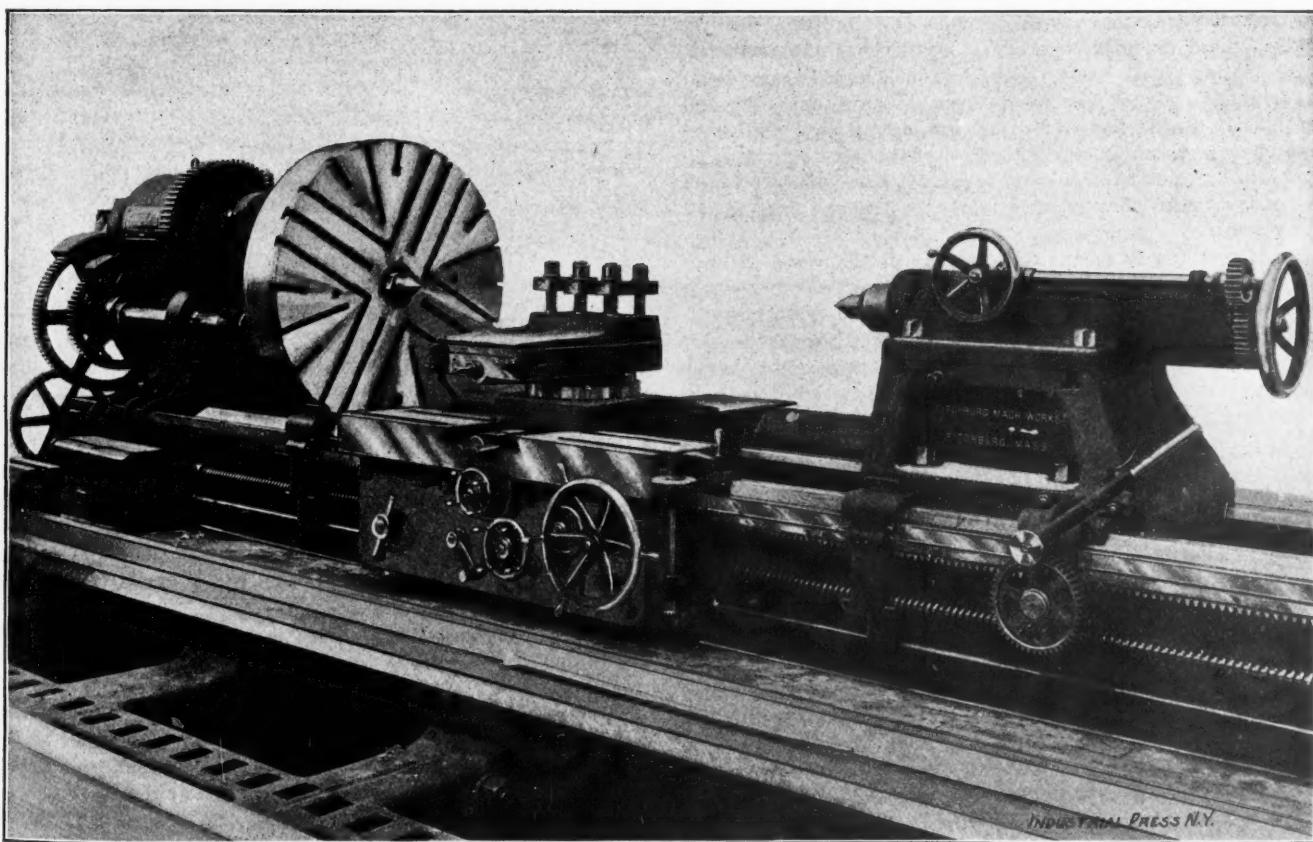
General View of one of the Sixty-inch Fitchburg Lathes.
